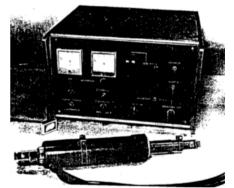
First UIT tool developed by E.O. Paton Welding Institute (Ukraine)
